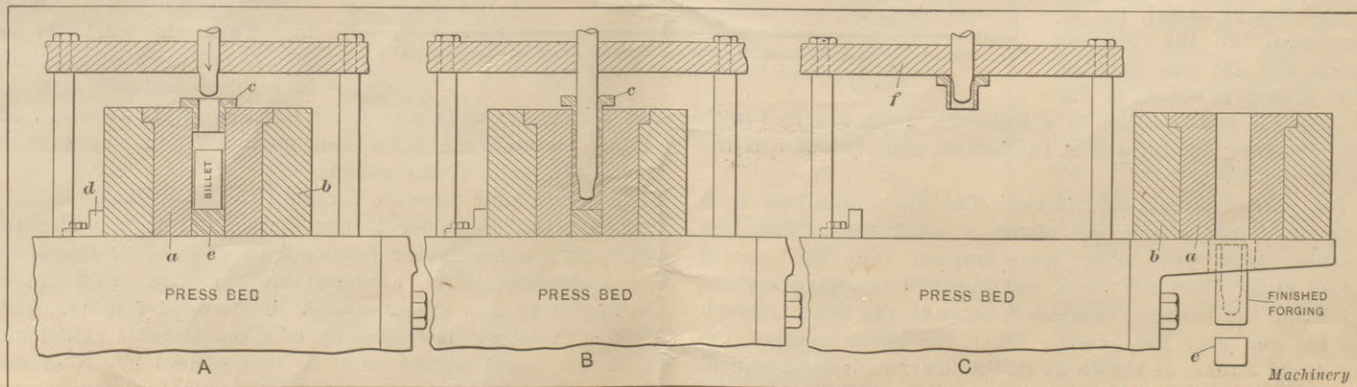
Improved Method of making Shrapnel Forgings in One Heat and One Operation
